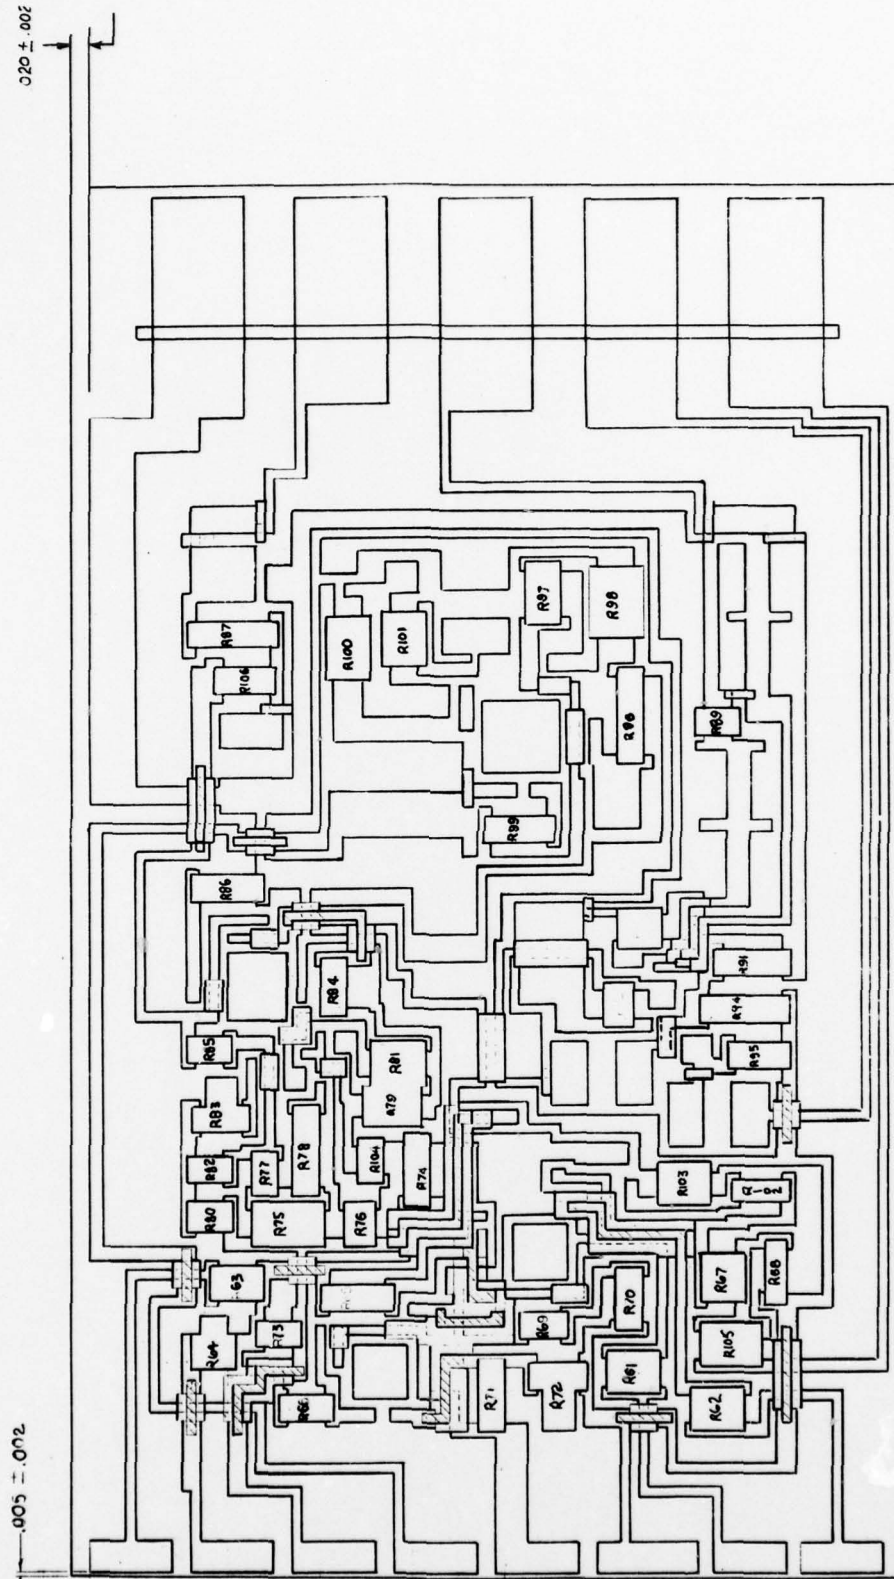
Substrate Component Assembly VCXO Hybrid Regulator Version
